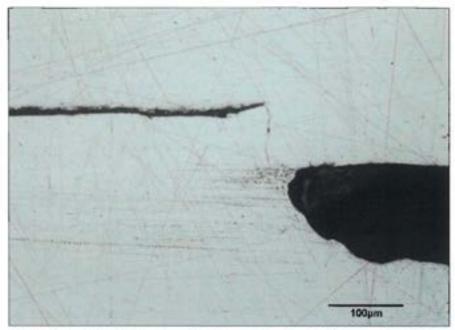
Magnified view of tube - tubesheet joint showing tight connection at corner of groove.
